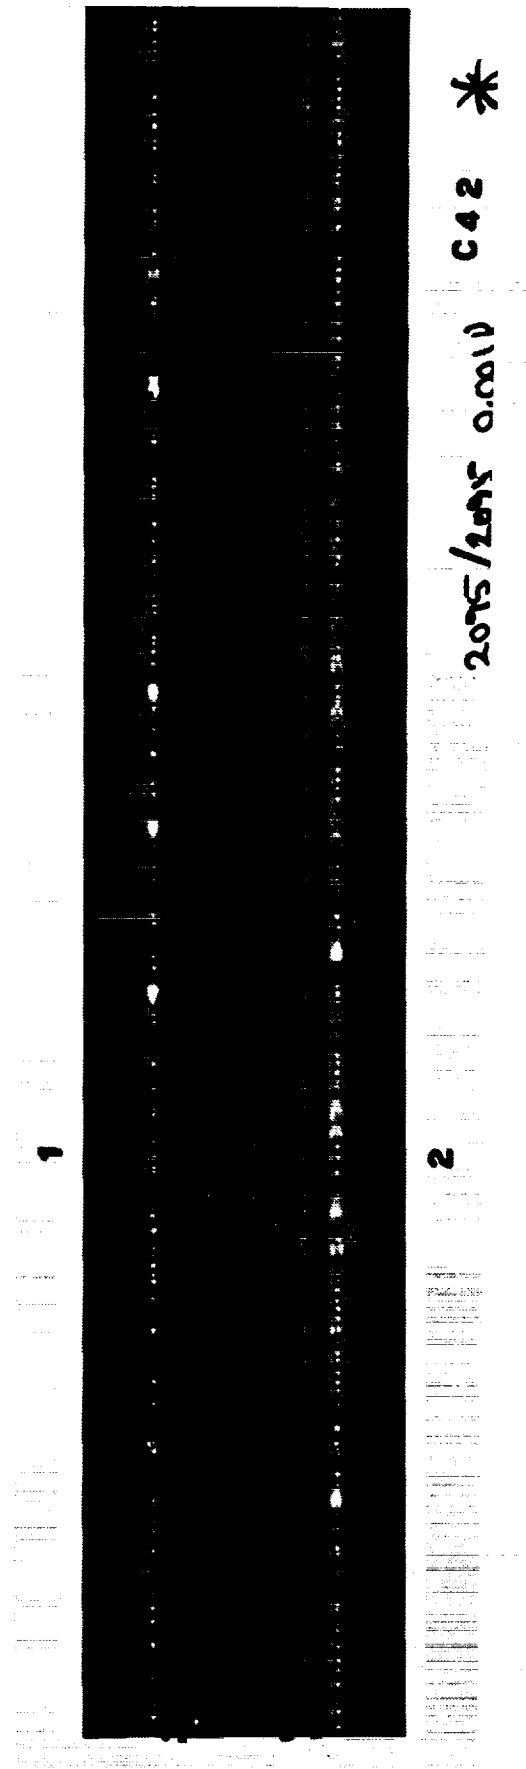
Contact Print of Radiograph Showing Porosity in 2095-T6 to 2095-T8 Welds on Prototype Parts That were Chemically Milled 0.001 in. (0.02 mm) Prior to Welding.
